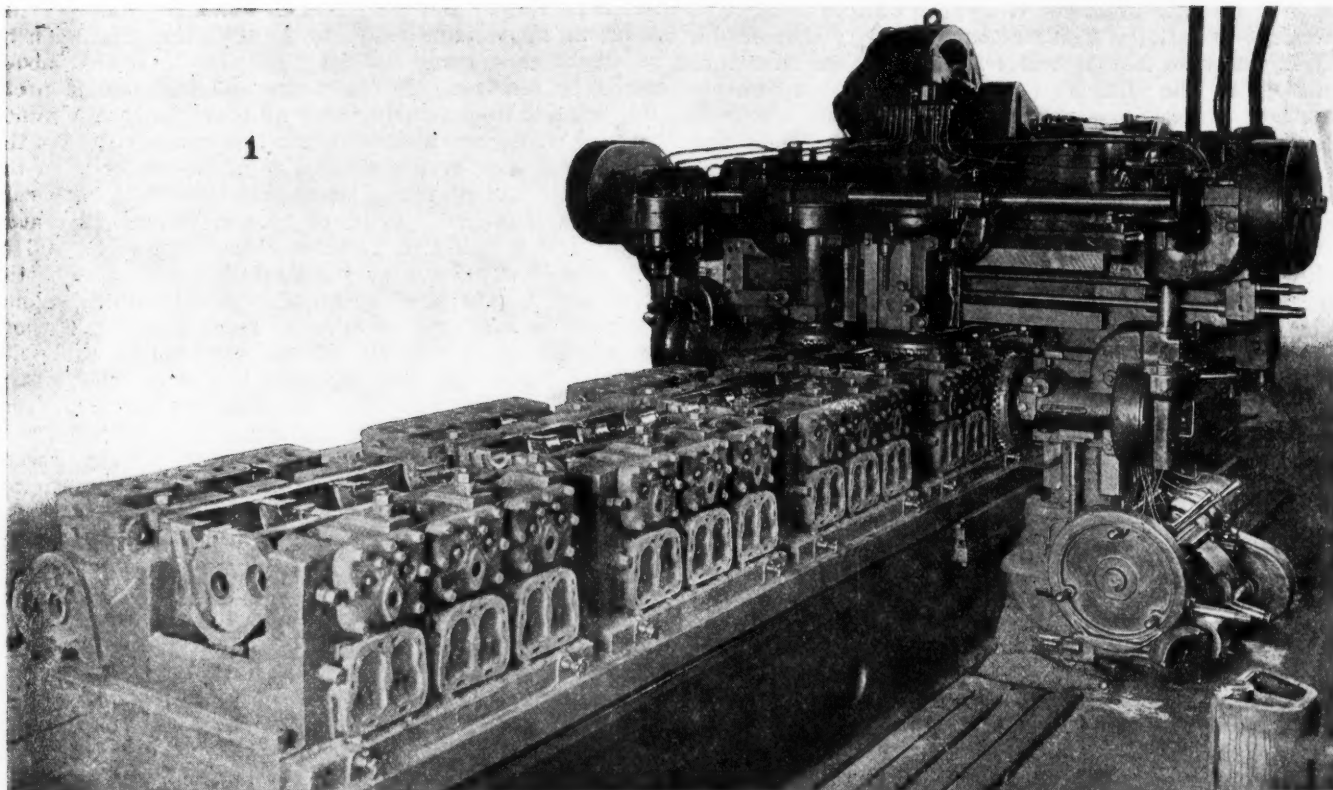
Milling cylinder blocks and heads in Ingersoll continuous milling machine. Fig. 2—Six-unit railroad gang drill for drilling all holes in top, bottom and sides.
